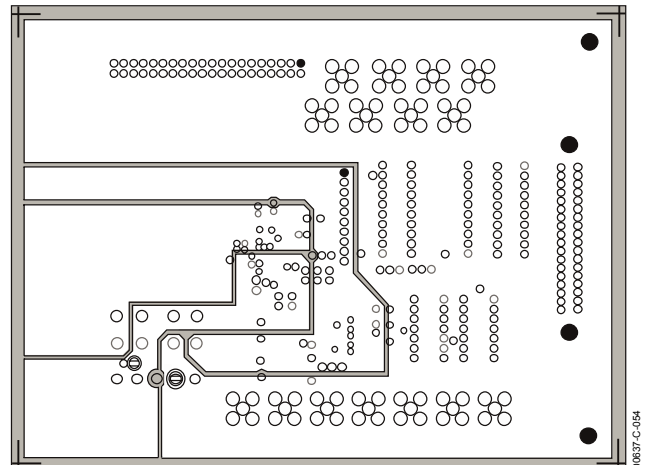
PCB Lay Out Pattern for Four-Layer AD9856 PCB Evaluation Board Layer 3—DUT +V, +5 V and 12 V Power Plane
